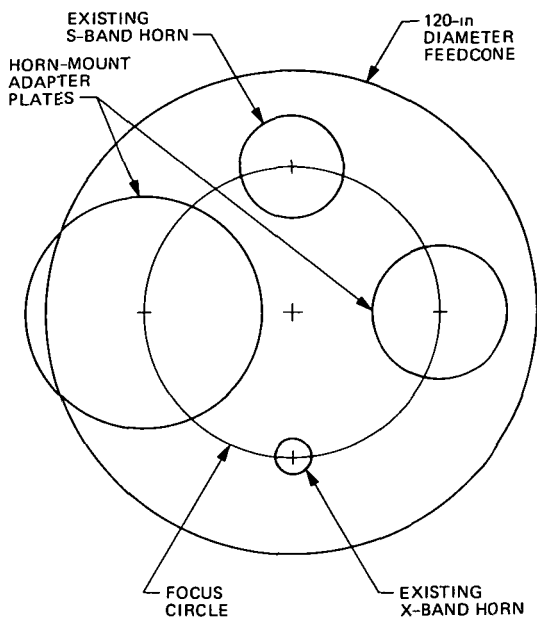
New design feedcone with adapter plates for mounting SETI feedhorns
